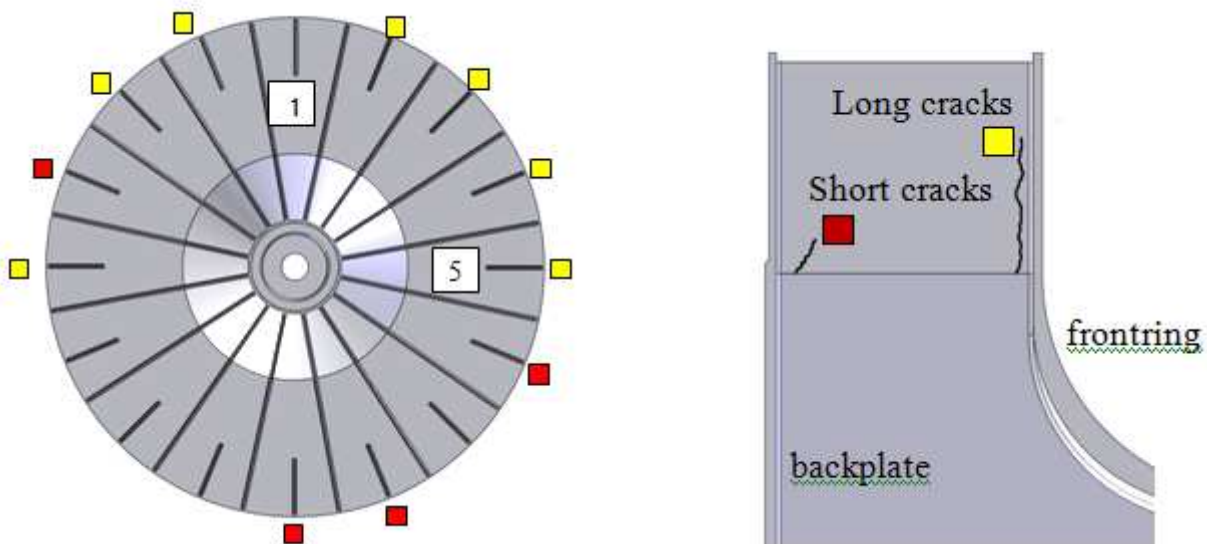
Sections through the impeller showing locations of the two types of crack
